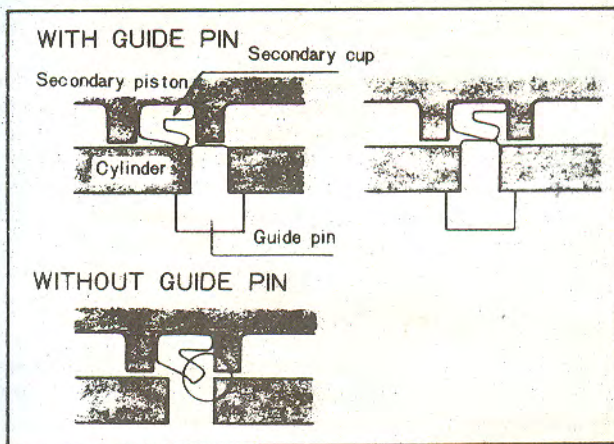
When dismantling the cylinder, the guide pin shown in Fig. 9.12. should be inserted instead of the stop bolt as shown. This will prevent damage to the secondary piston cup.
